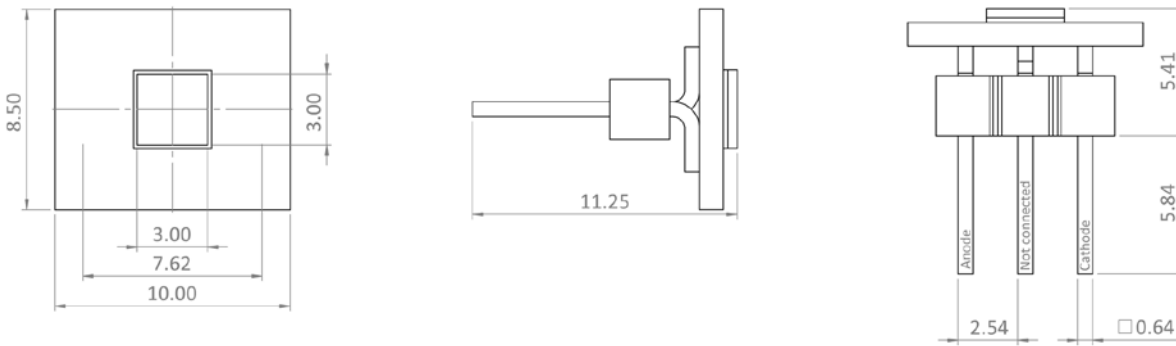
AFBR-S4K33C0115B Preassembled on PCB with Pins (Available for Evaluation Purposes)¹
